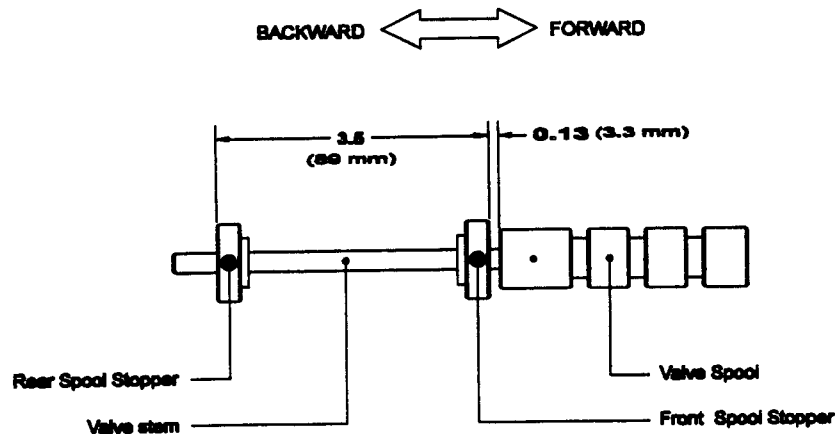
Spool valve assembly illustrating the initial settings for the front and rear spool stoppers. Arrow indicates shuttle feed plate movement.
